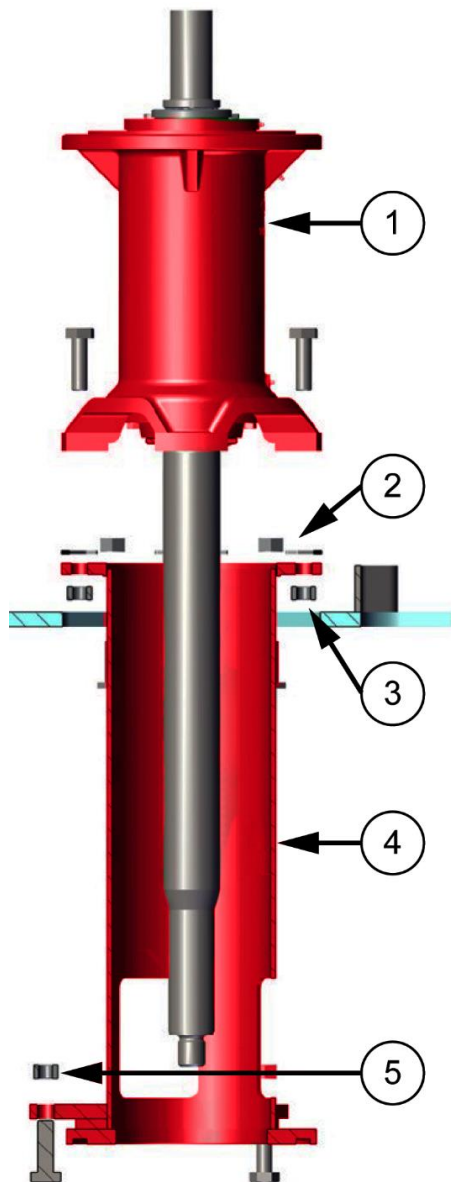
Fitting the Bearing Assembly into the Column and Mounting Plate.
